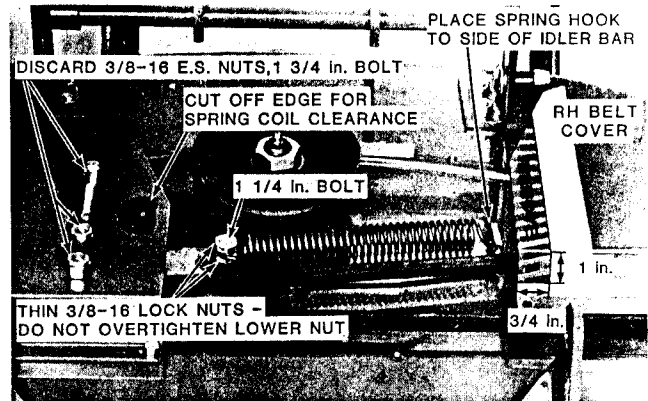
Lower Idler Spring (42 in./107 cm Mower)
